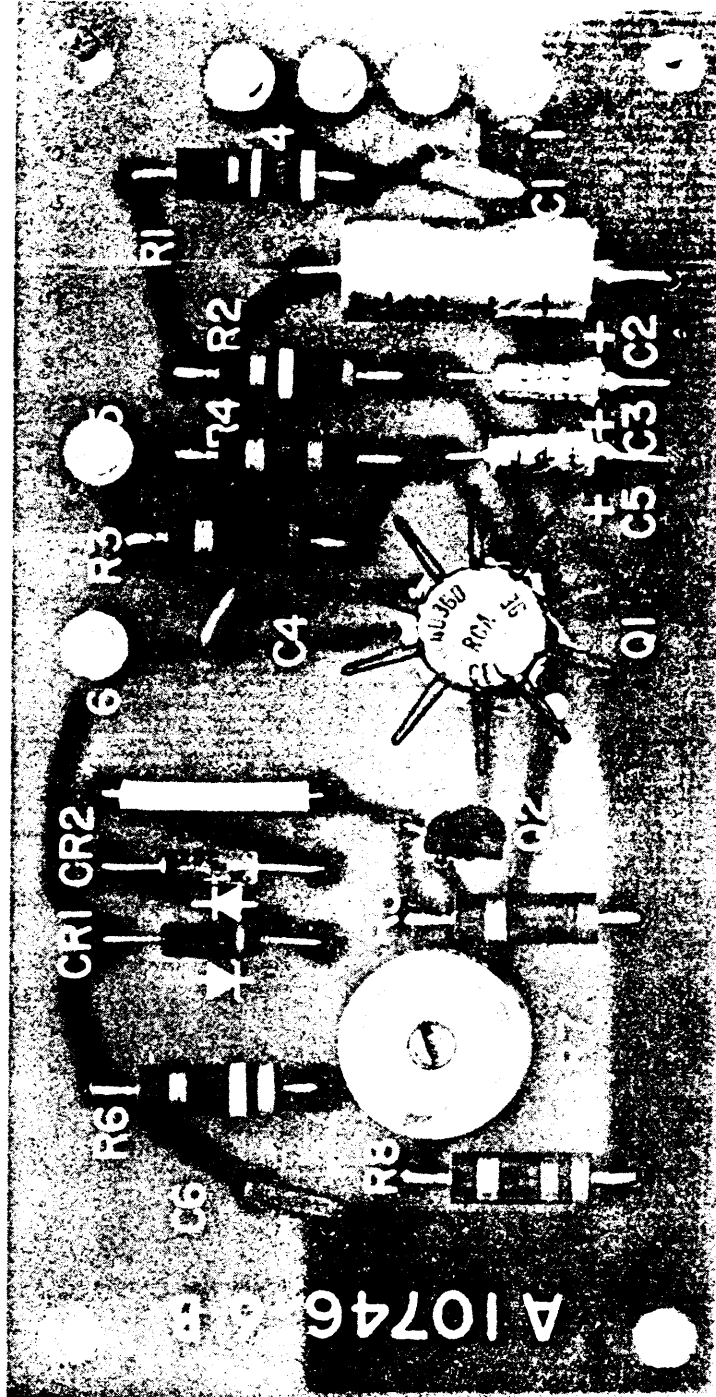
REGULATOR ASSEMBLY 1A1
